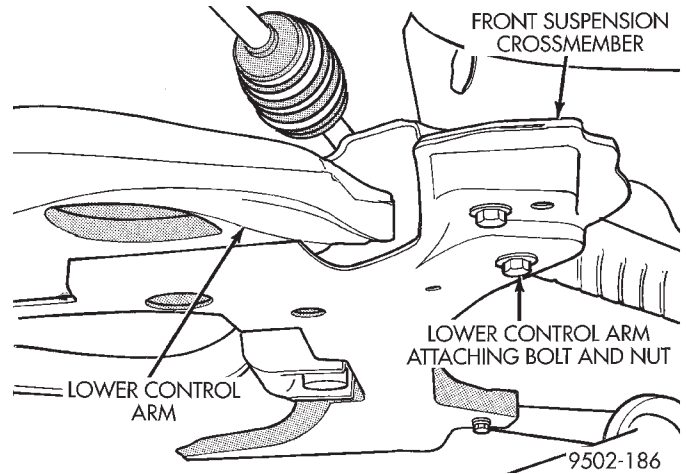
Lower Control Arm Attachment To Front Suspension Crossmember
